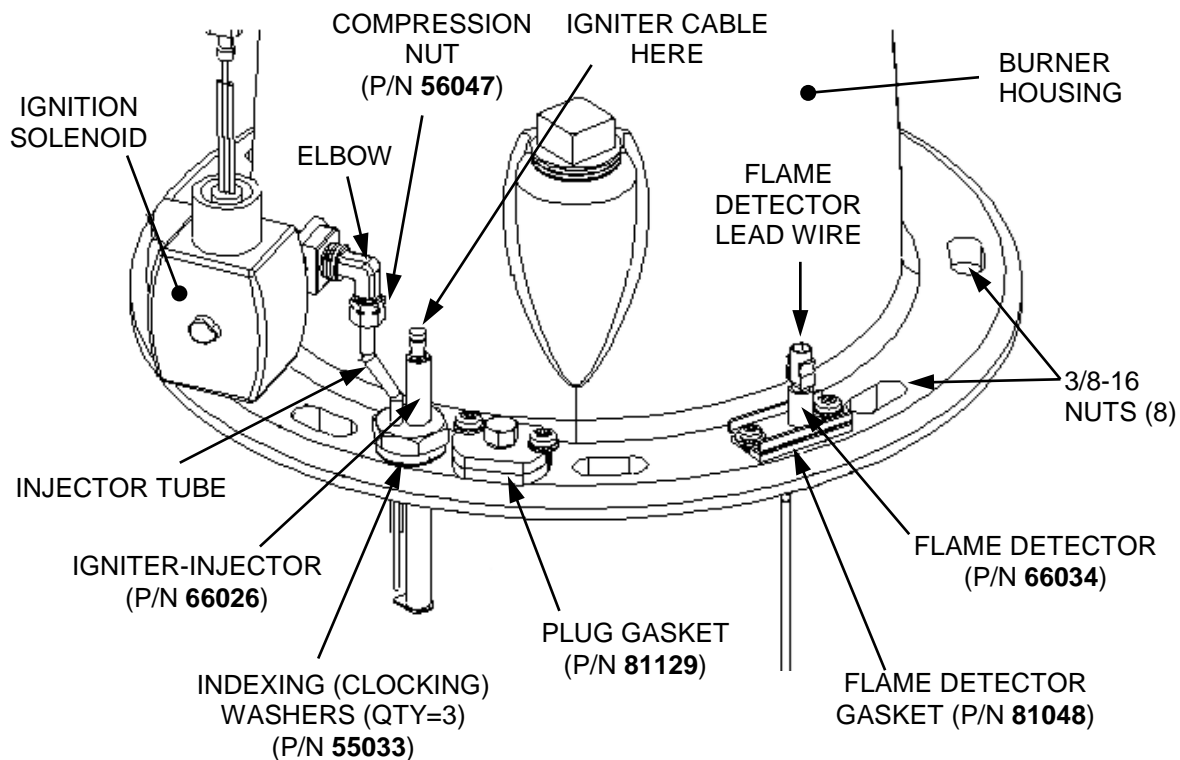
Partial View Showing Flame Detector, Igniter-Injector, and Staged Ignition Assembly on Burner Housing Flange
